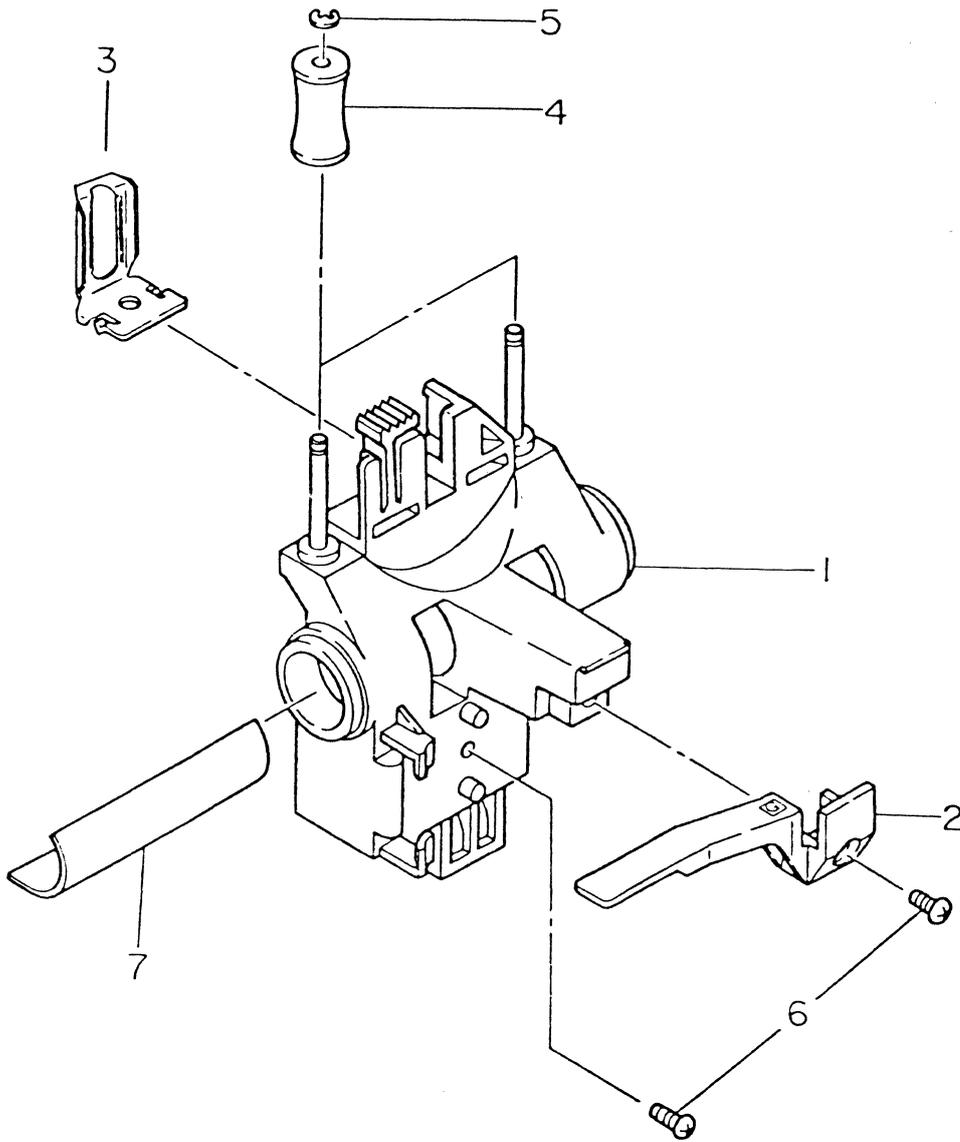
Ribbon Drive Assembly (LR-193456-6)
